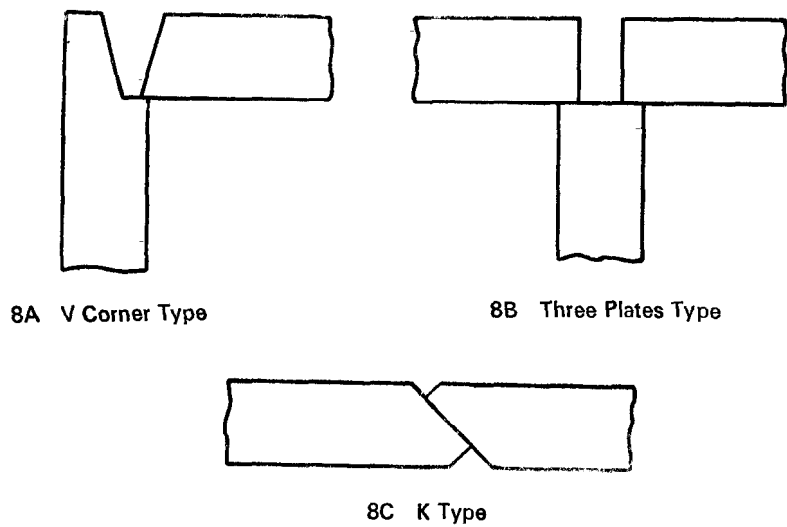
SOME UNUSUAL PREPARATION WHICH MAY BE USED WITH SUBMERGED ARC AUTOMATIC WELDING
